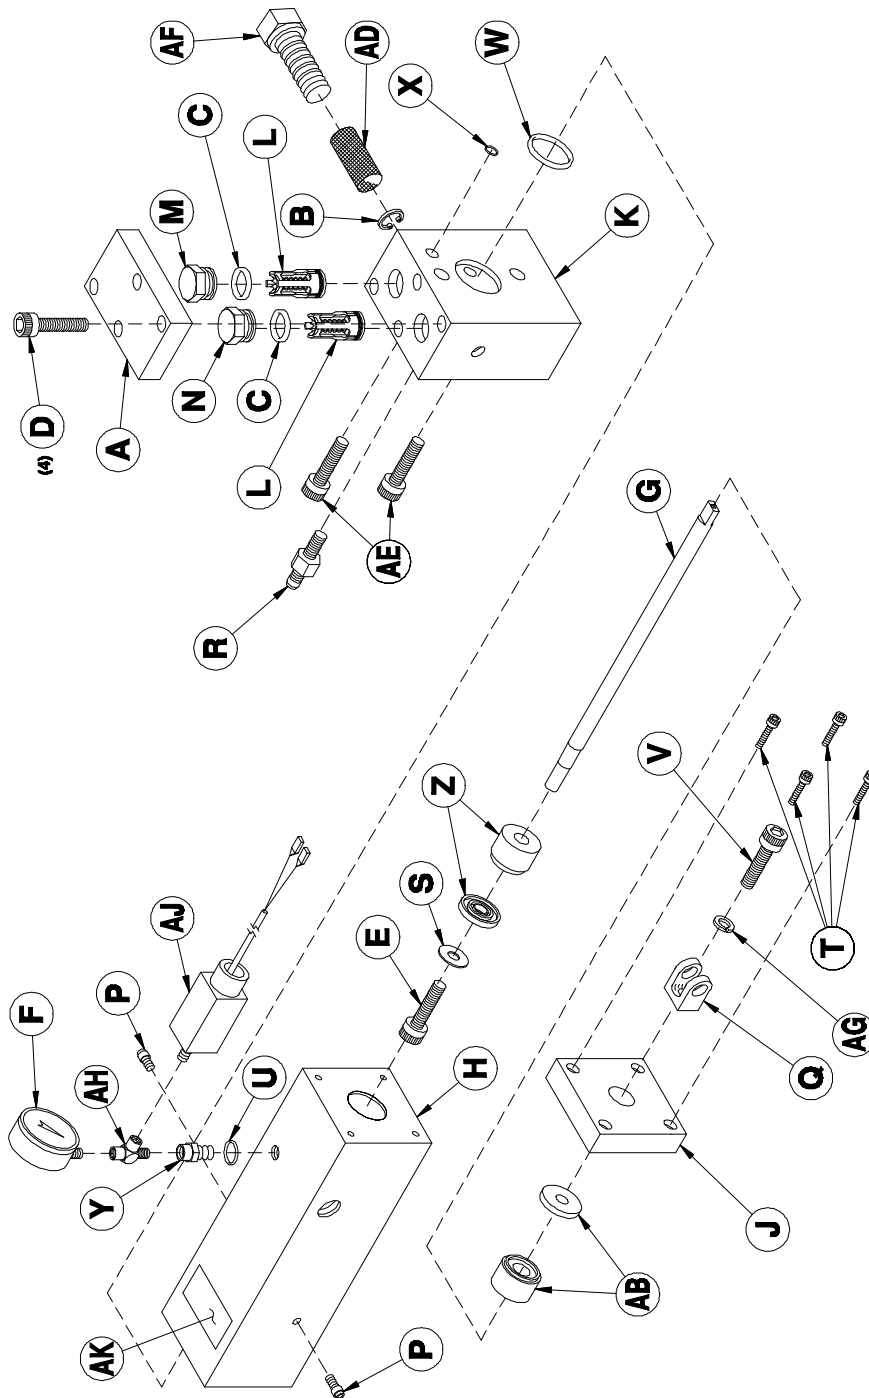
Pump Mounting Assembly (Part No. 15828) Exploded View
